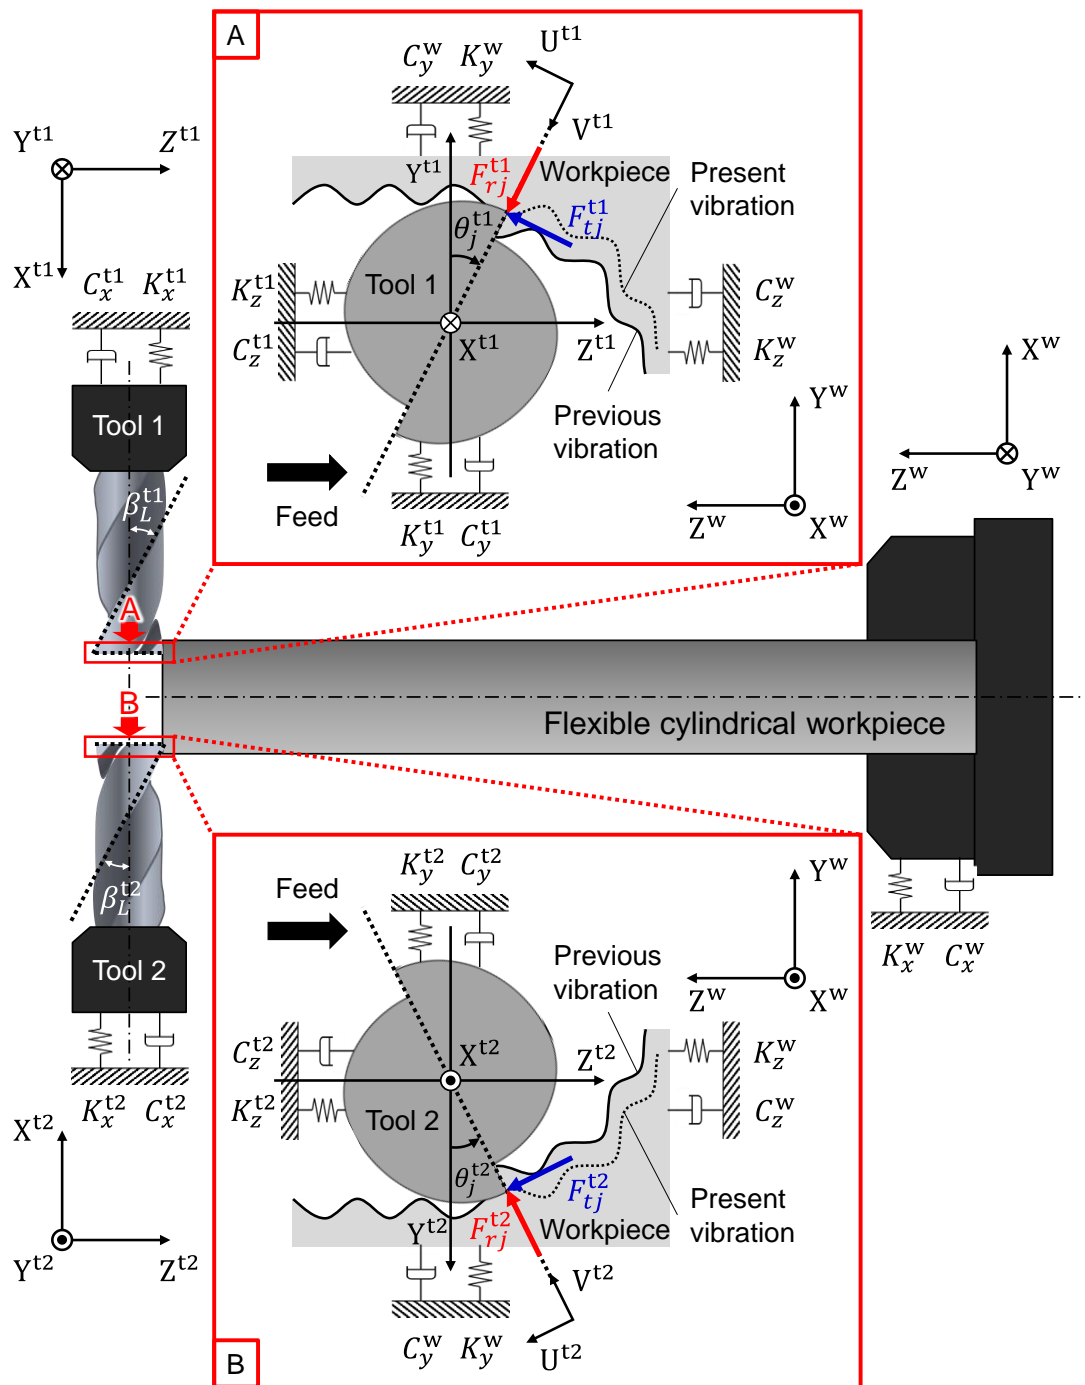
Schematic diagram of a double-sided parallel end milling process
